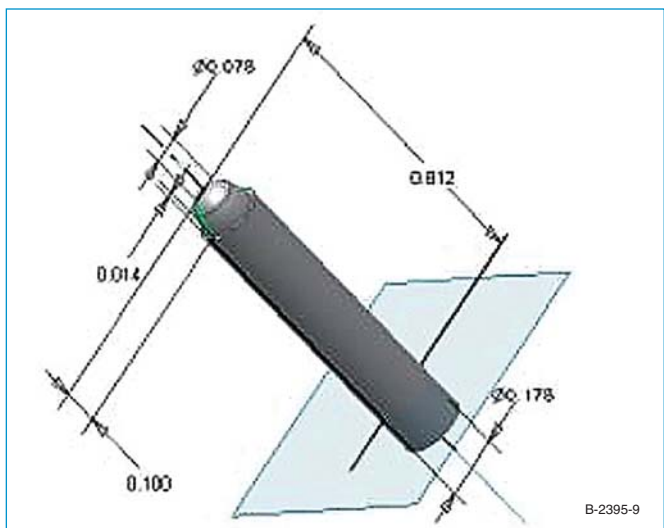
Dimensions and shape for the diaphragm dimpling die. The die drawn here was lathed from an aluminum rod. A soldering iron tip of the proper radius with the tip rounded will work as well. It is suggested to make a shallow groove to mark dimpling depth.
